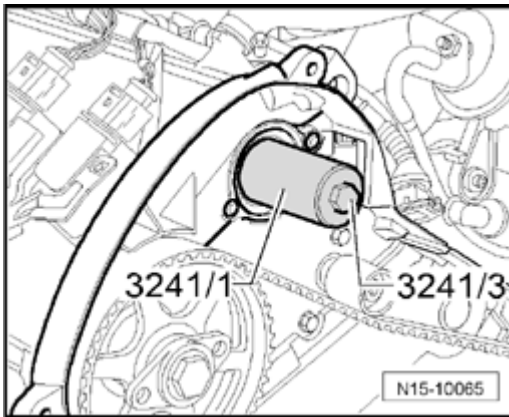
Pressing In New Seal With Seal Installer 3241/1 And Bolt 3241/3
